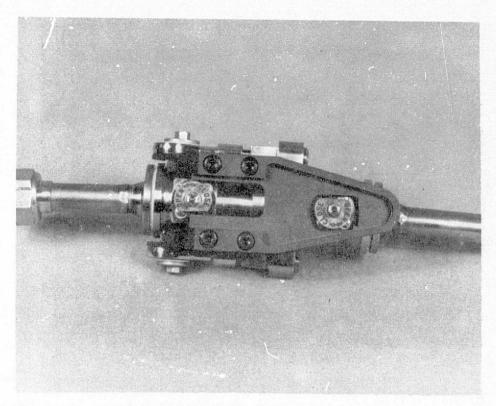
ASSEMBLED PID (TOP VIEW)
